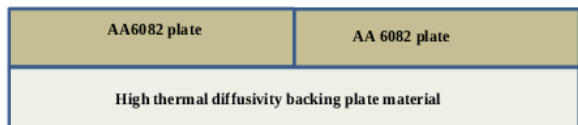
Arrangement of plates to be welded using FSW process
